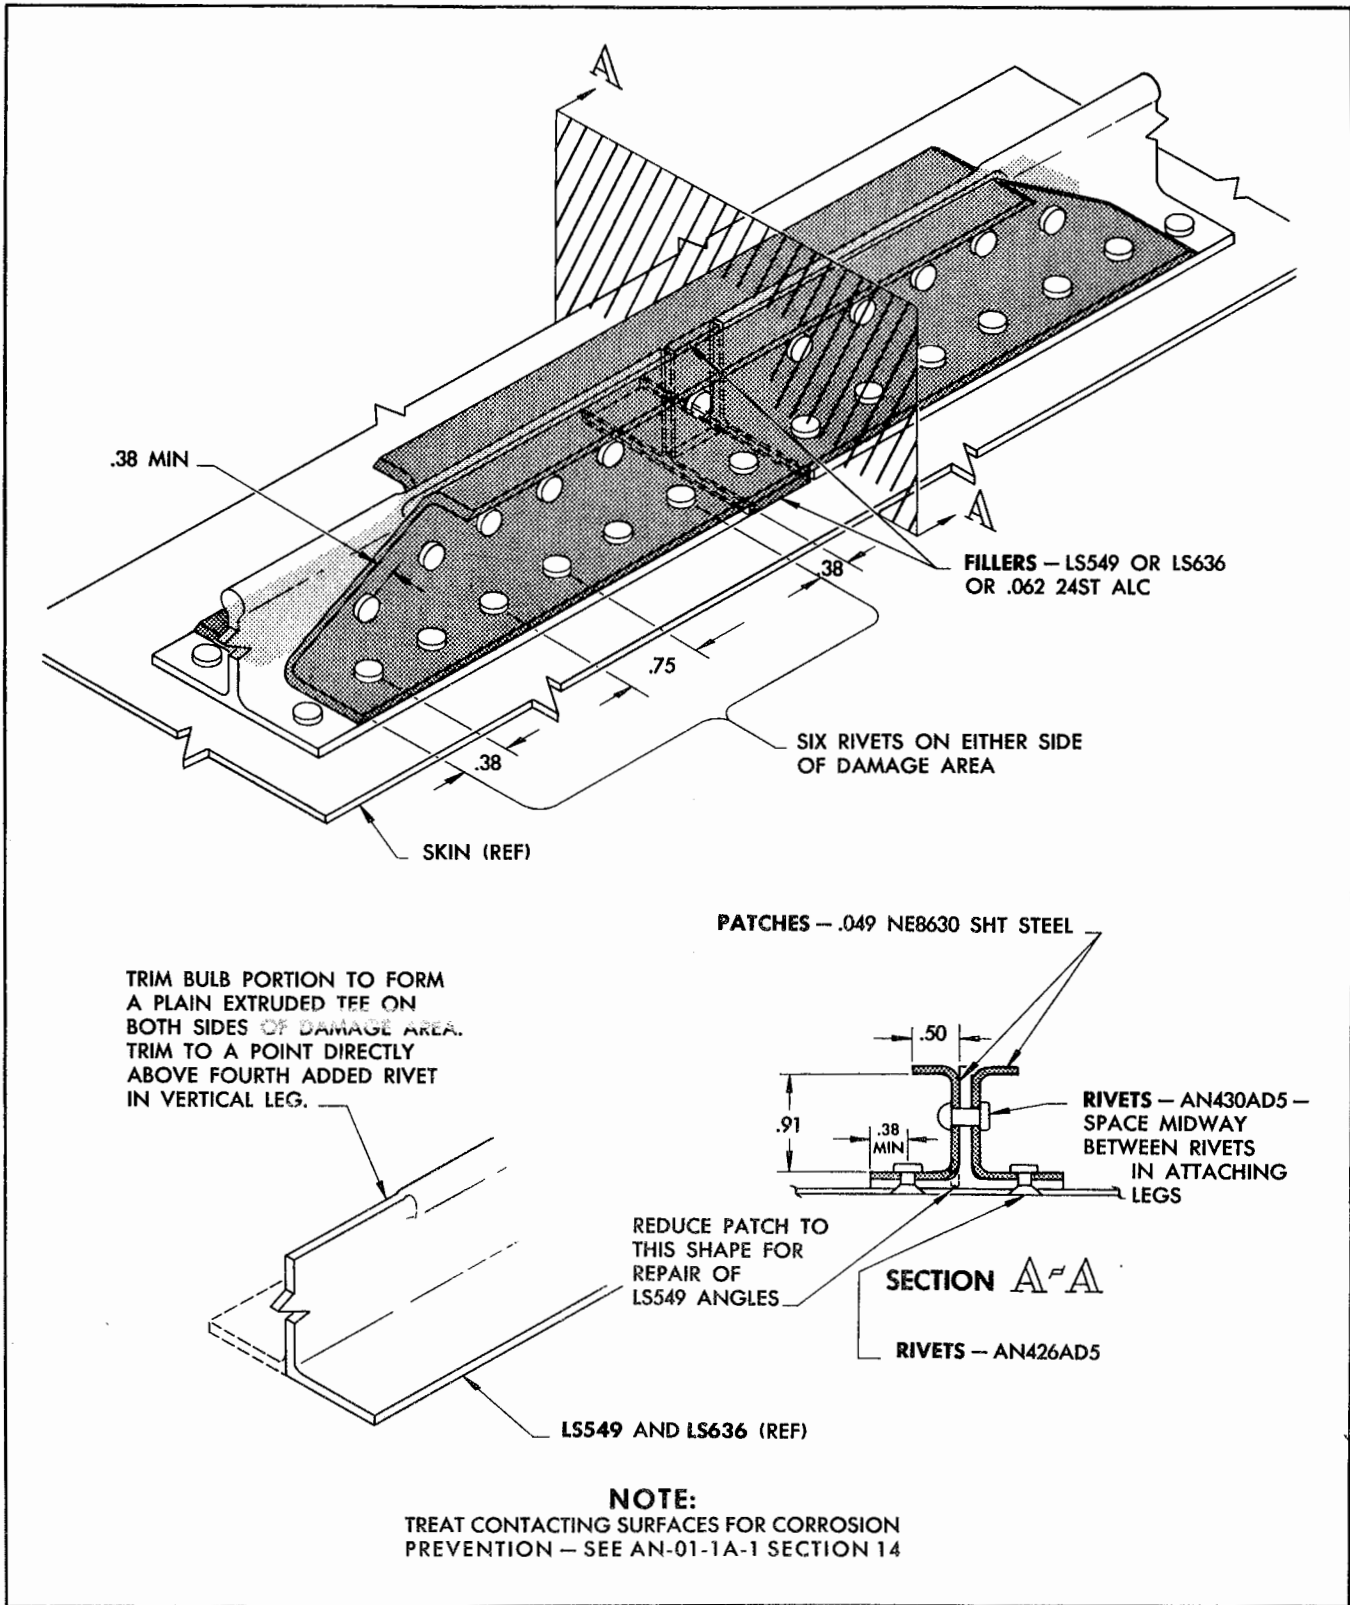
A — Stringer Repair (Alternate) — Lower Surface
